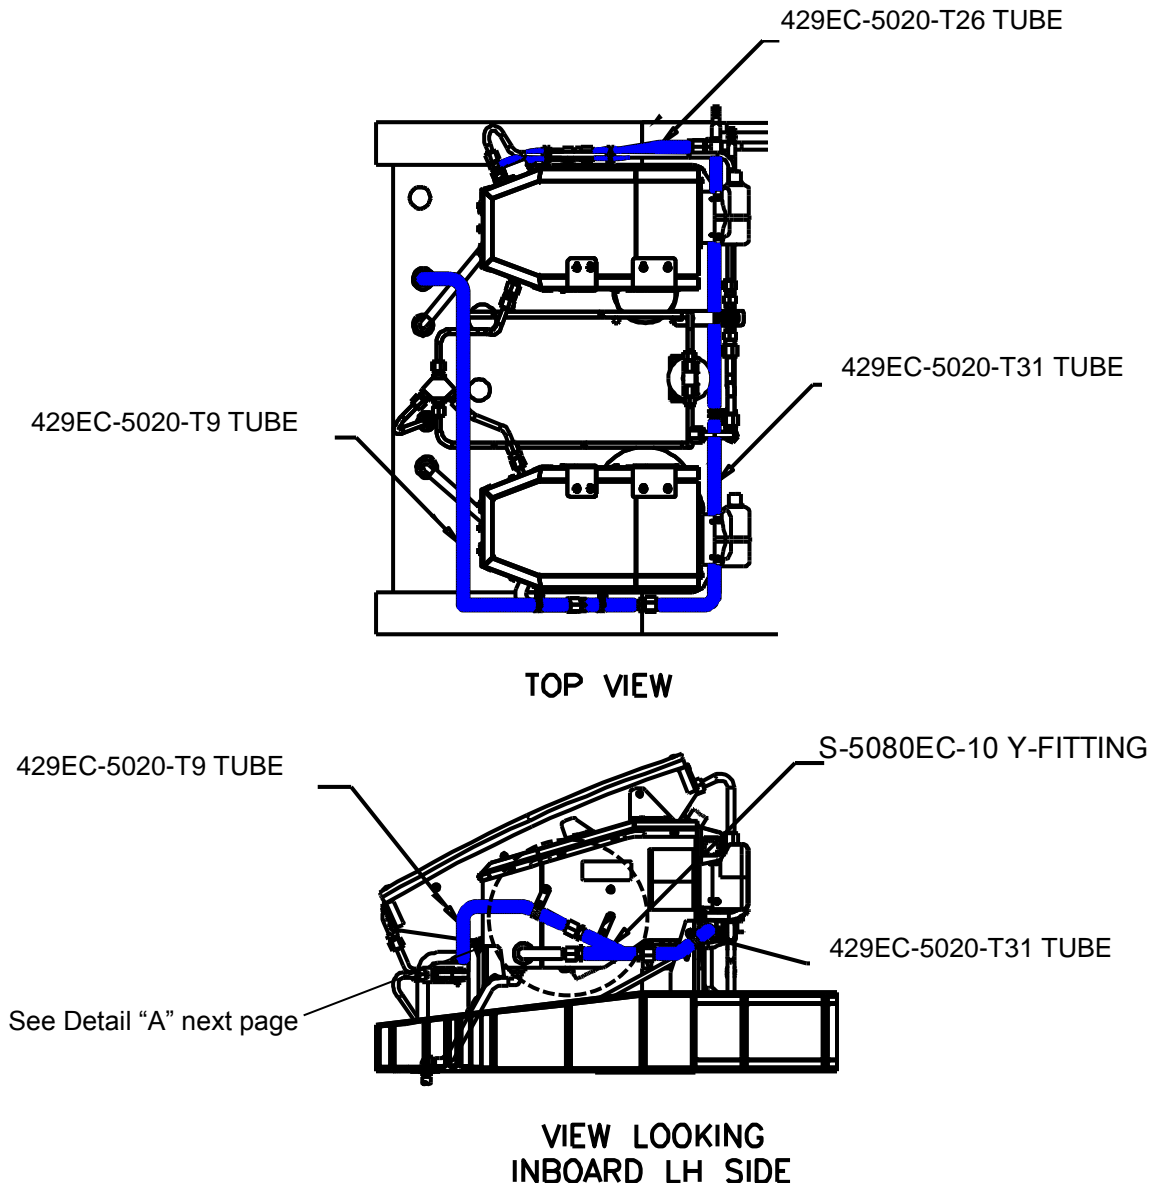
DUAL EVAPORATOR CONFIGURATION. Insulate tubing and Y-fitting with ES02127-10 Firesleeve. Seal ends with 1-608036-4 fusion tape.
